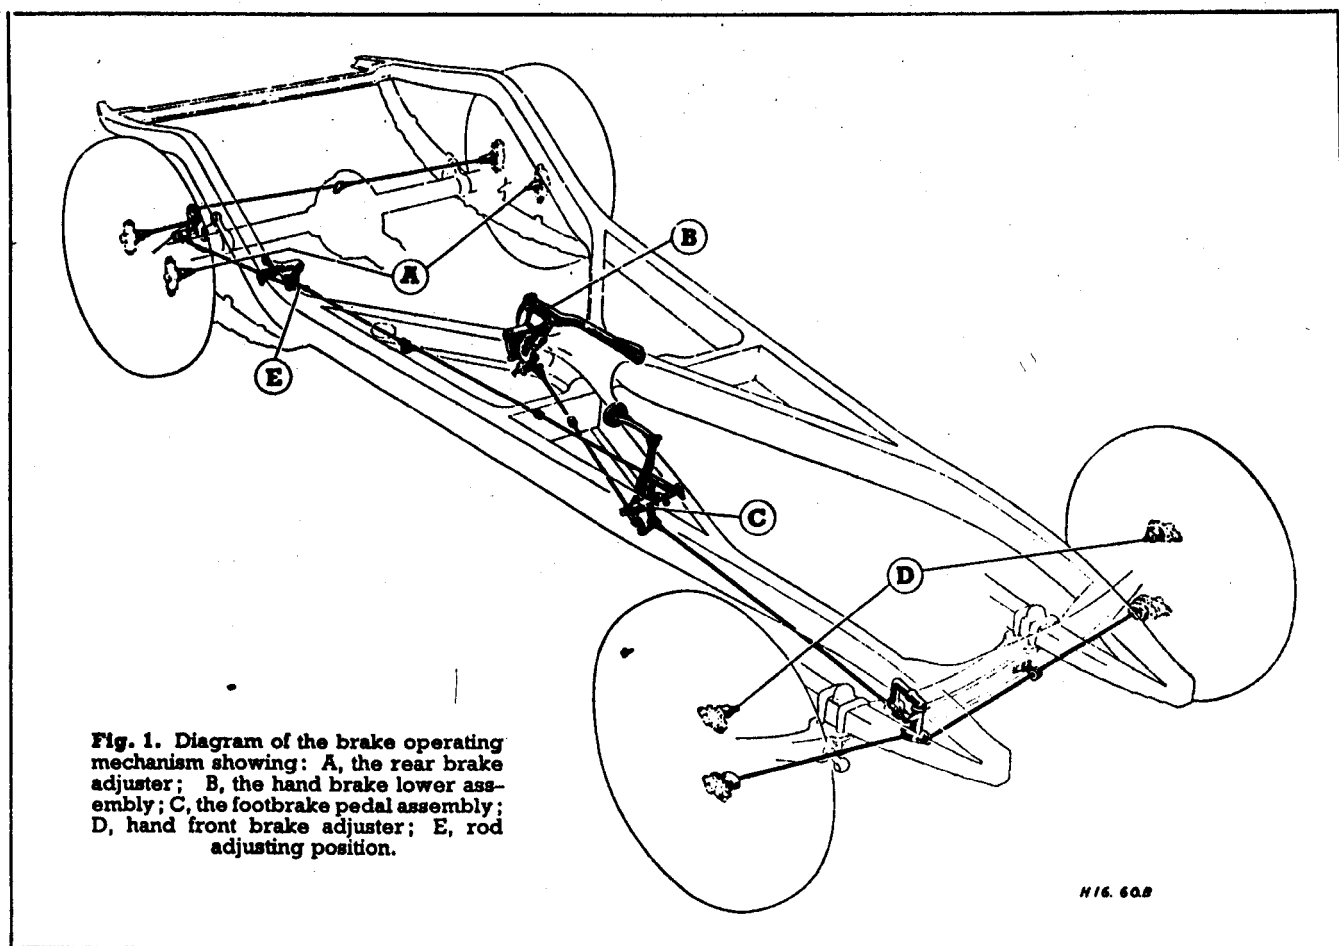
Diagram of the brake operating mechanism showing: A, the rear brake adjuster; B, the hand brake lower assembly; C, the footbrake pedal assembly; D, hand front brake adjuster; E, rod adjusting position.
